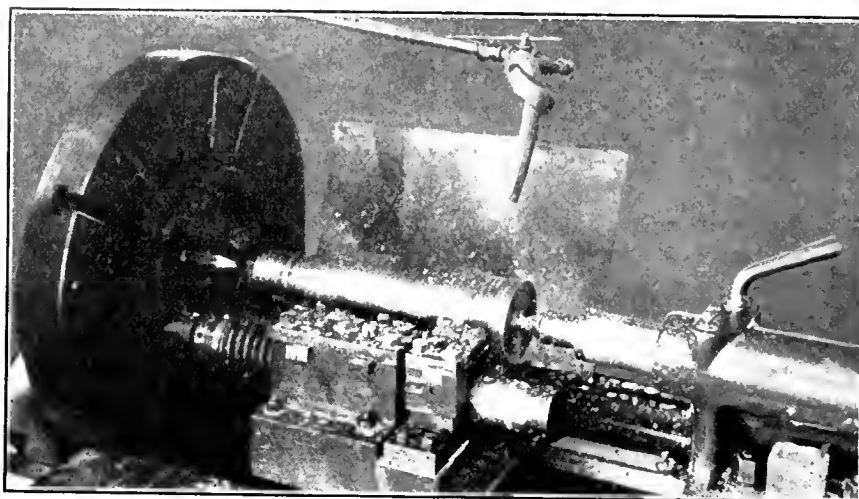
GROOVING AND WAVING ON 22 IN. "McDOUGALL" LATHE
